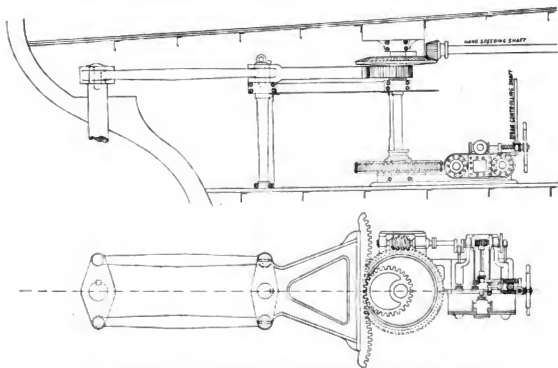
GENERAL LAYOUT OF HARFIELD'S COMPENSATING STEAM AND HAND OPERATED STEERING GEAR.
